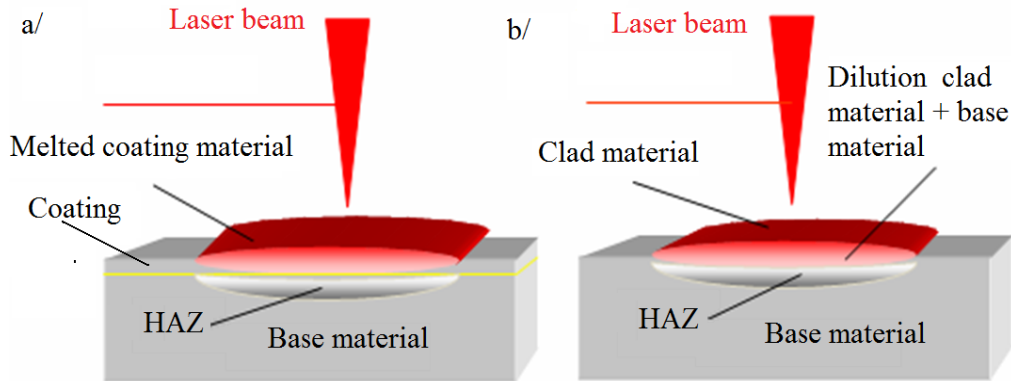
Laser surface treatment techniques; (a) laser surface remelting, (b) laser cladding
